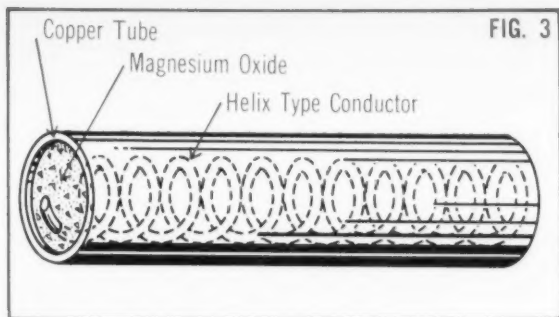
(Above) Swaging assembles components of heating elements quickly and economically.
